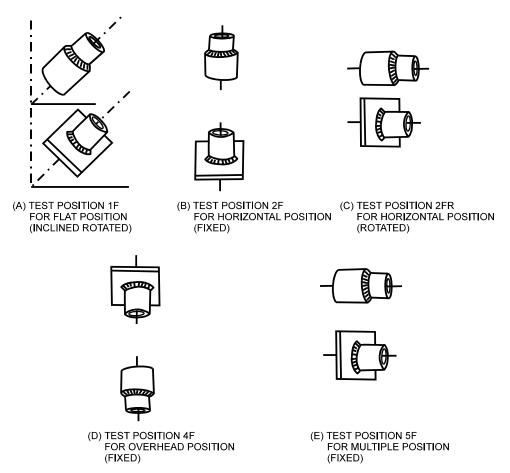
Position for Test Pipes for Fillet Welds (see 4.2.5)
